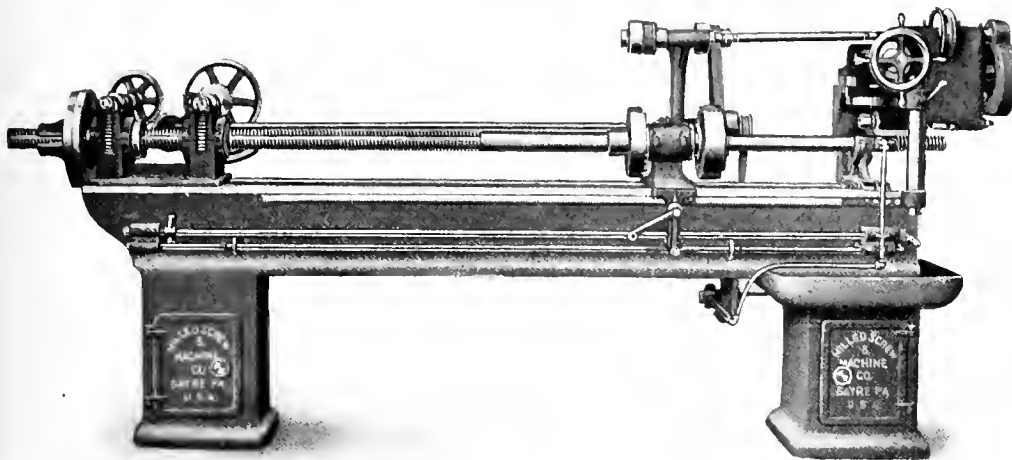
Universal Thread Milling Machine, of Direct and Simple Design
